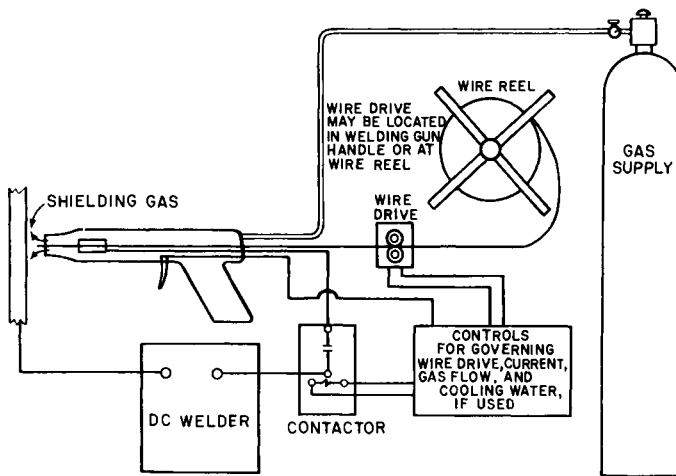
Schematic diagram of gas metal-arc welding.^(1,25)
